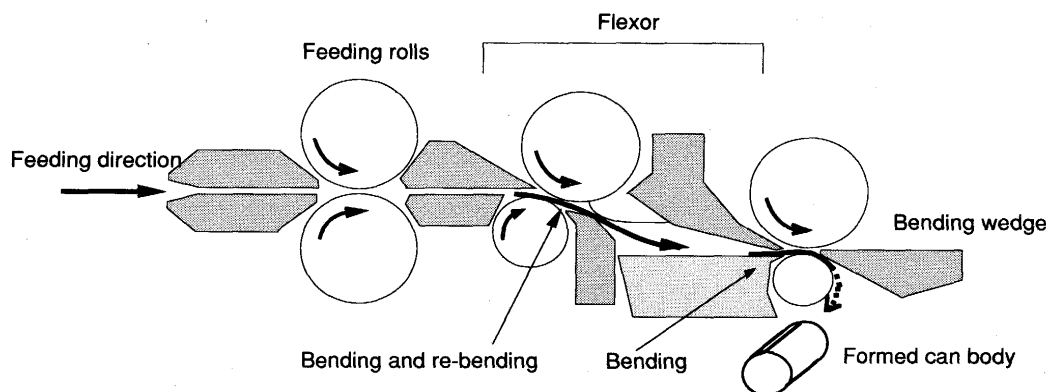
Schematic illustration of the device for 3-pieces can body maker.
